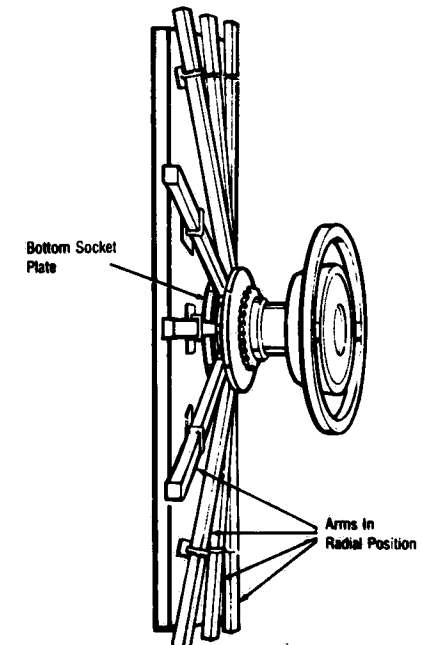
TORQUE CHECK, CHAMBER DOOR.
